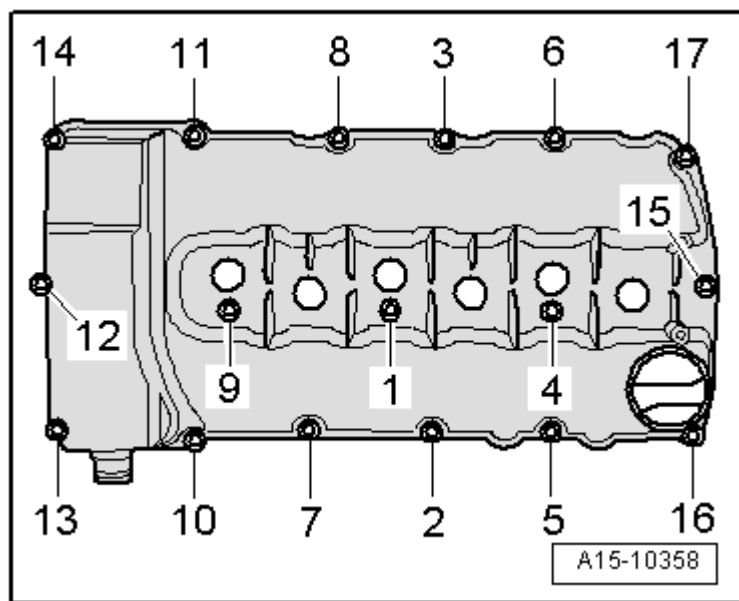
Cylinder Head Cover Bolt Tightening Sequence
